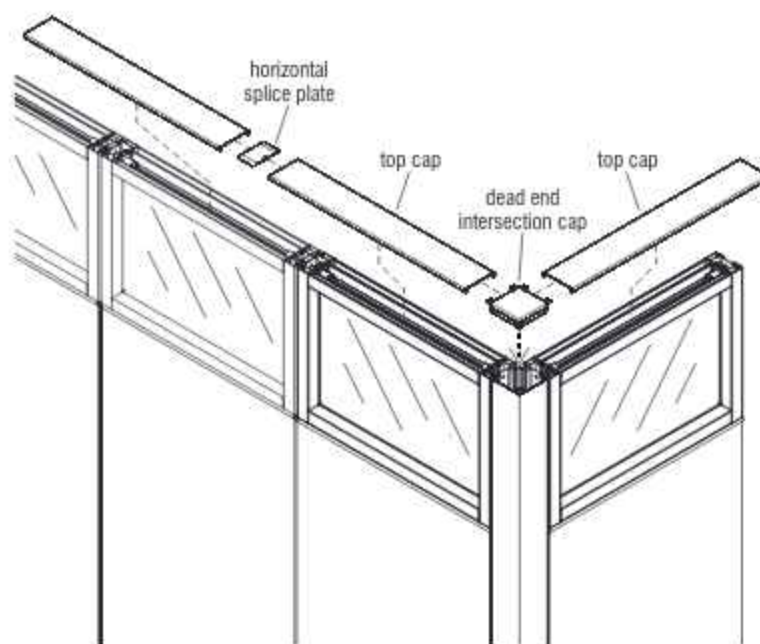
Stacking Sections (aluminum frame) - Top Cap Installation
